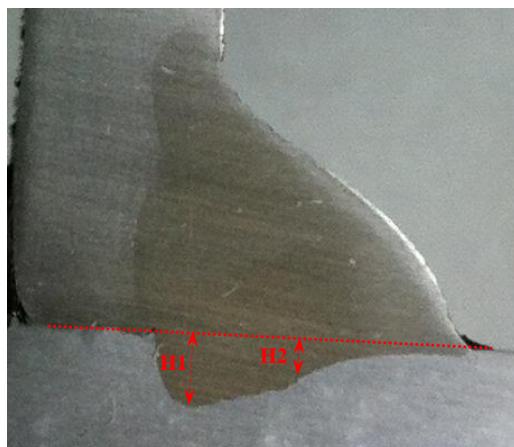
DOF of welded specimen according to AWS A3.0
